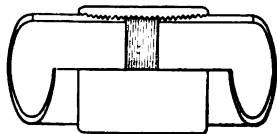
Section of Allison vanishing-thread tubing coupling and joint. Not upset.
